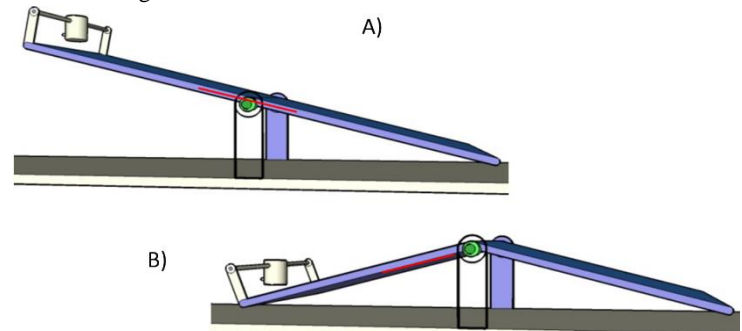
Locking Mechanism to Prevent a Windstorm or Typhoon
